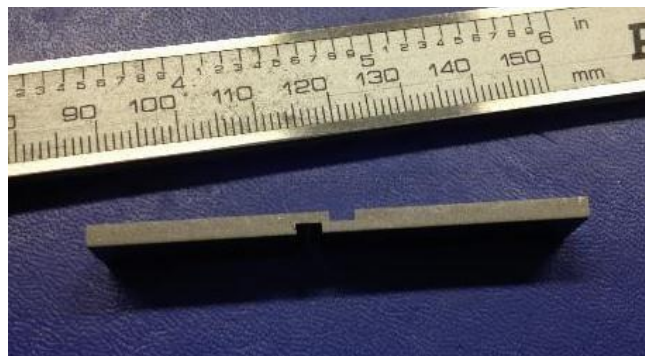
Example machined specimen showing the upper and lower milled sections
